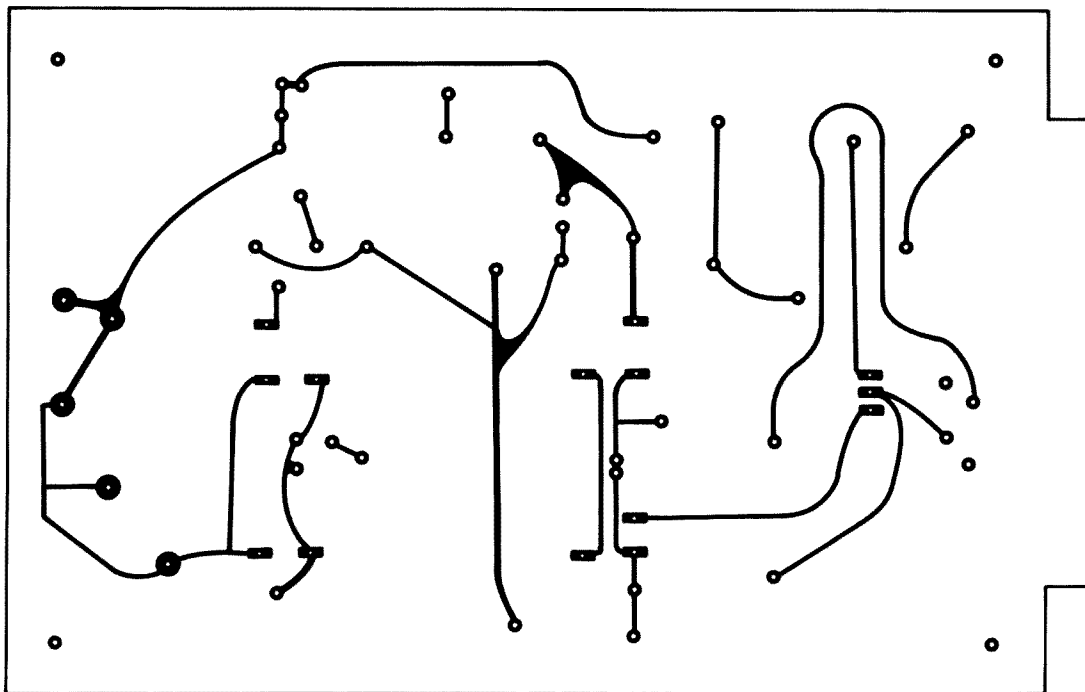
Component side of PC board. The holes in the four corners should be used for pattern alignment during PC board etching.
